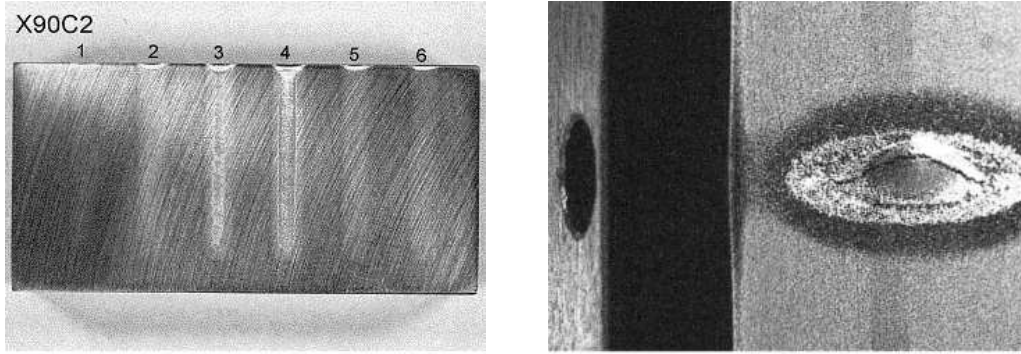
Effects of laser hardening with constant energy and velocity: over-heating and surface melting close to workpiece edge (left) and above holes inside the workpiece (right).
